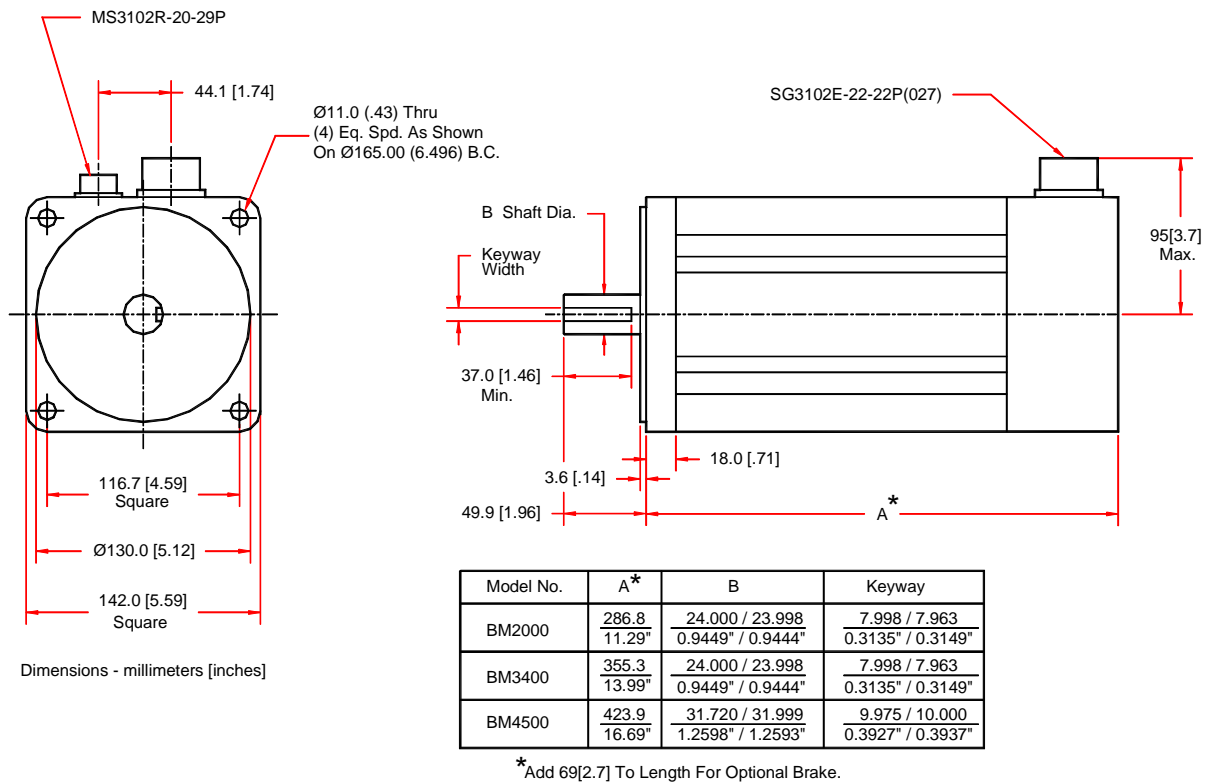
BM2000, BM3400, BM4500 Model Dimensions
